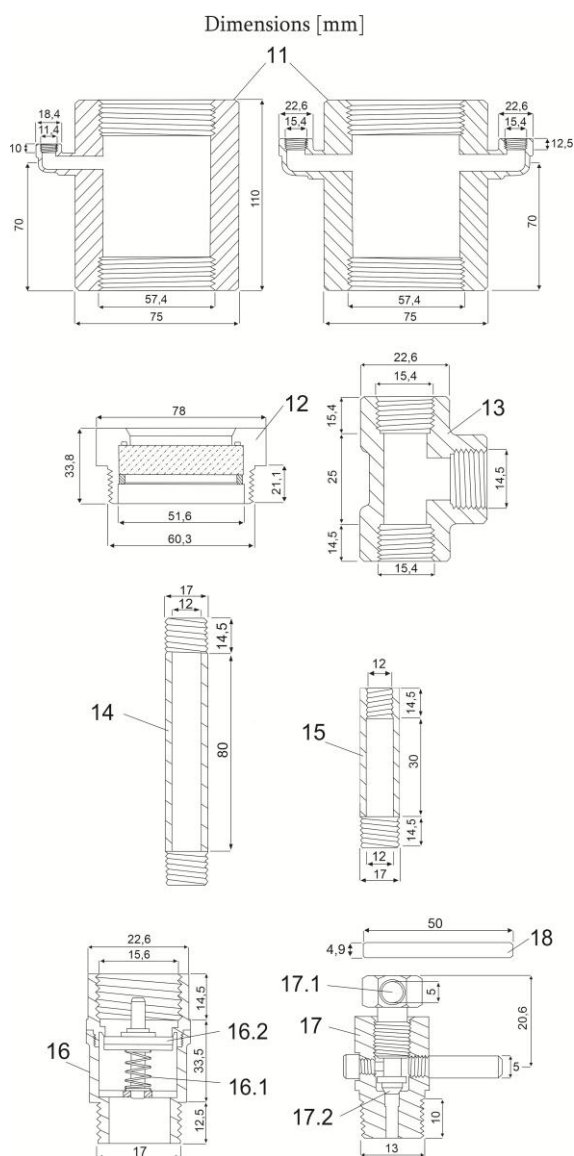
Chamber components: 1 – upper sight glass; 2 – lower sight glass; 3 – high-pressure coupling with integrated side elbows; 4 – T-adaptor; 5 – longer pipe nipple; 6 – shorter pipe nipple; 7 – check valve; 8 – bleed valve; 9 – bar handle; 10 – lower mount pressure gauges
